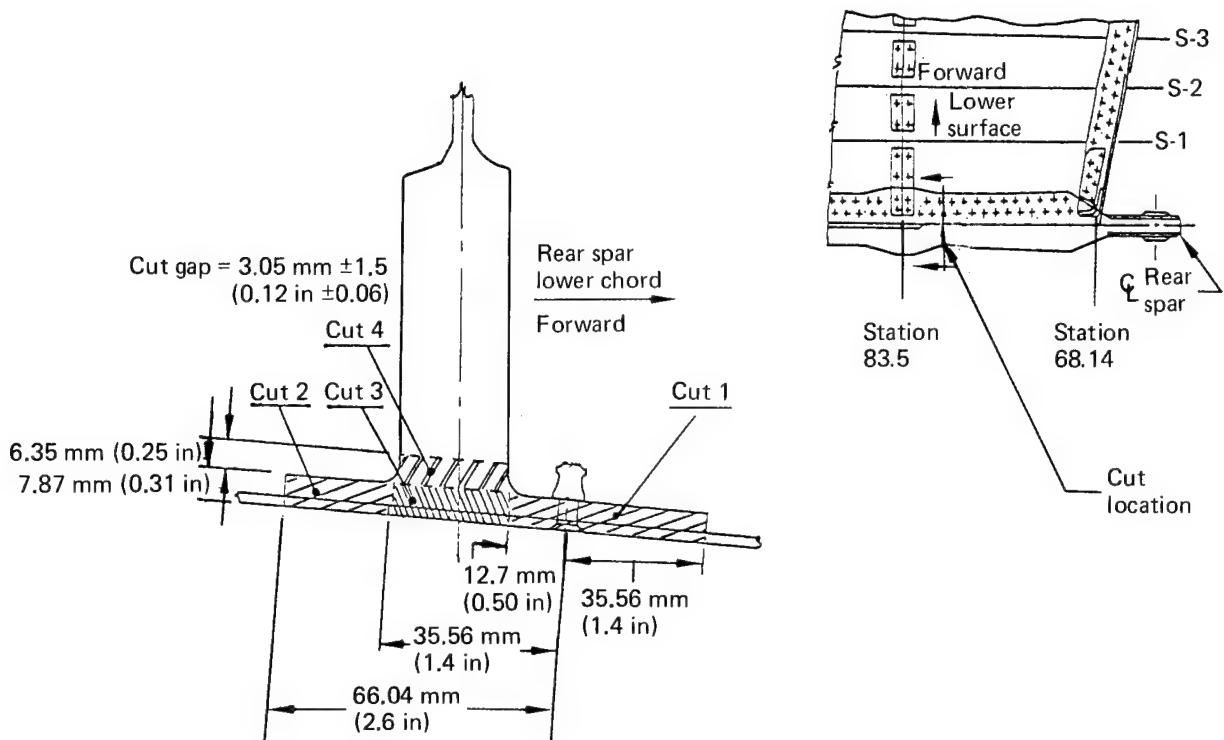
Stub Box Damage Tolerance Test—Rear-Spar and Lower Chord
